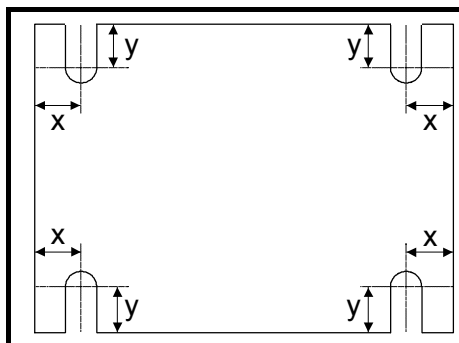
Switching frequency filter inductor type 1 dimensions
